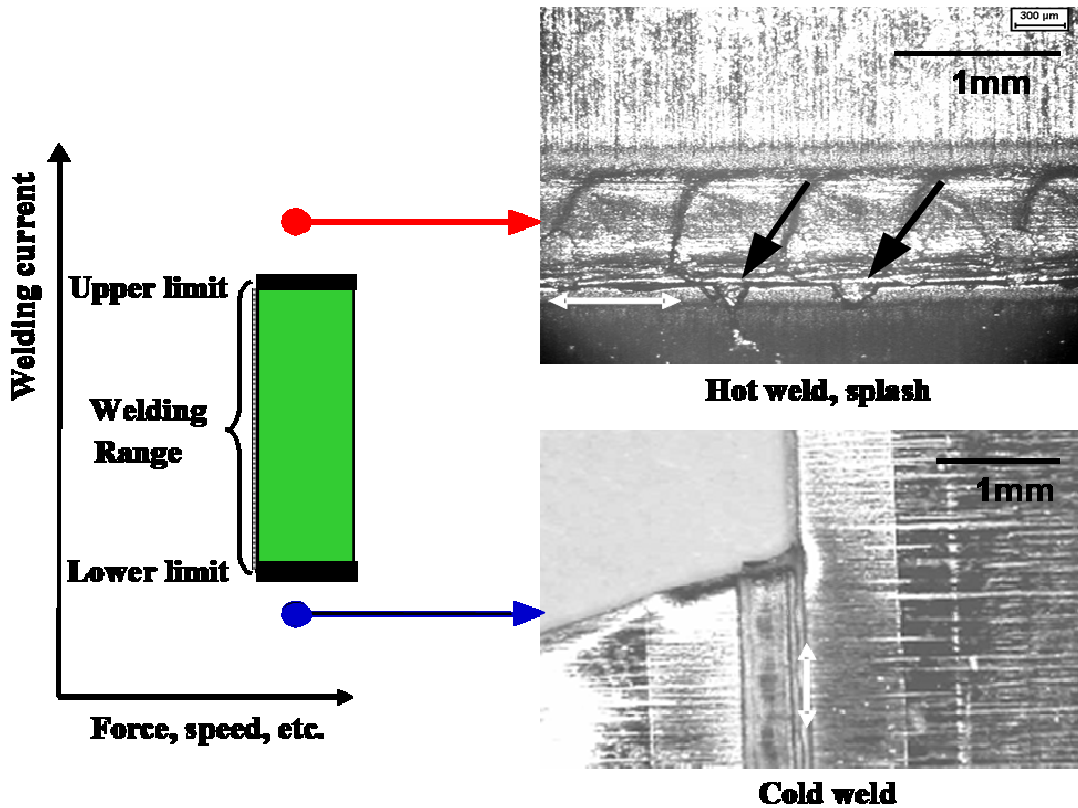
The left-hand side shows a schematic of the weld range and its associated welding operating window or welding latitude. On the right-hand side, the top picture shows an enlargement of an overheated or hot weld. Here, the arrows indicate the splashes; the welding direction is from right to left. The bottom picture shows a cold weld, which is broken by the tear test. In both pictures, the white arrows indicate the length of a weld nugget and the distance scales are 1 mm.
